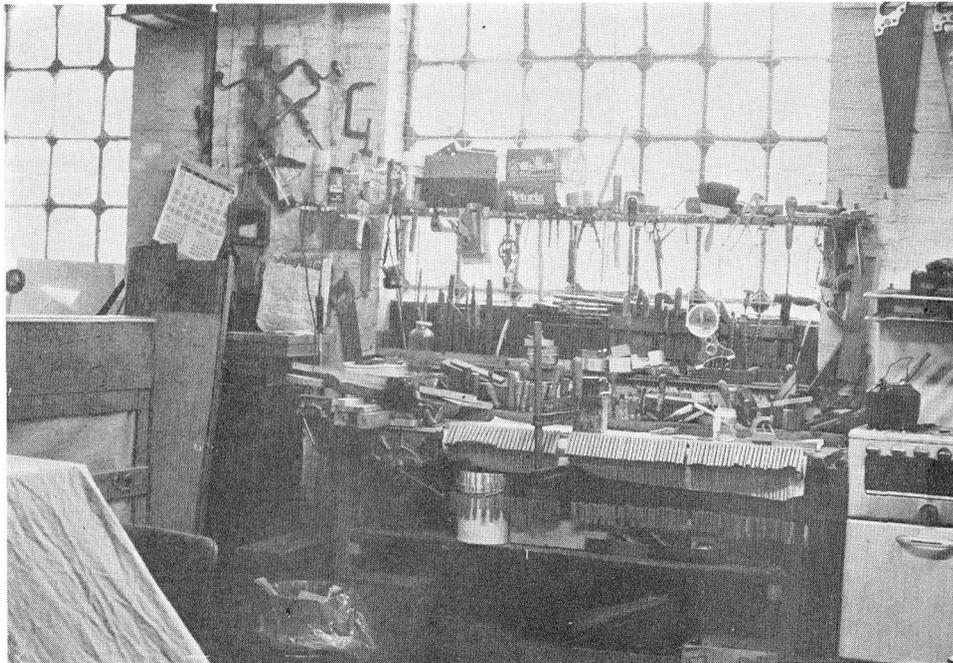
Small craft workshops such as this are often overlooked even by local historians. This photograph shows a piano repairer's in Camden. Note piano actions hanging on edge of bench and tools; also glue pot on gas stove (right) and dust sheets covering pianos (left). The bench is at the window for maximum light.
